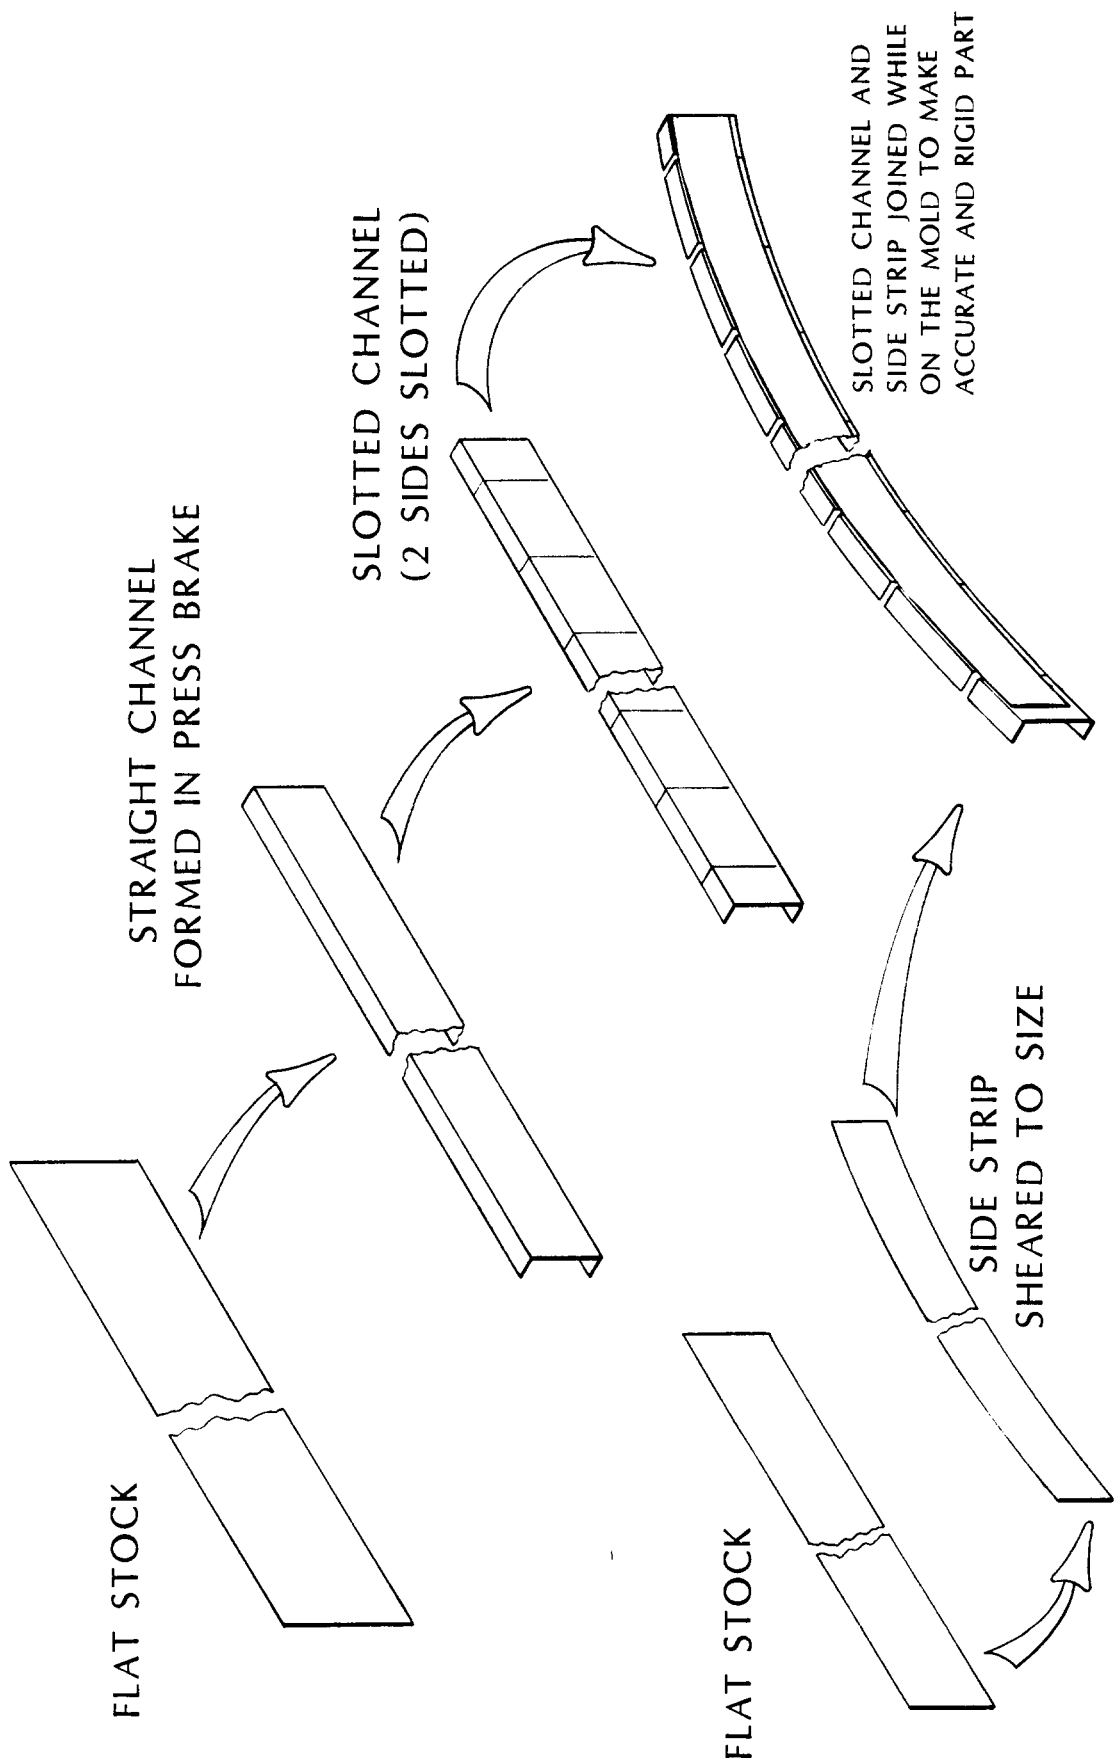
PROTOTYPE OPTICAL ASSEMBLY SIDE CHANNEL AND STRIP PRODUCTION
